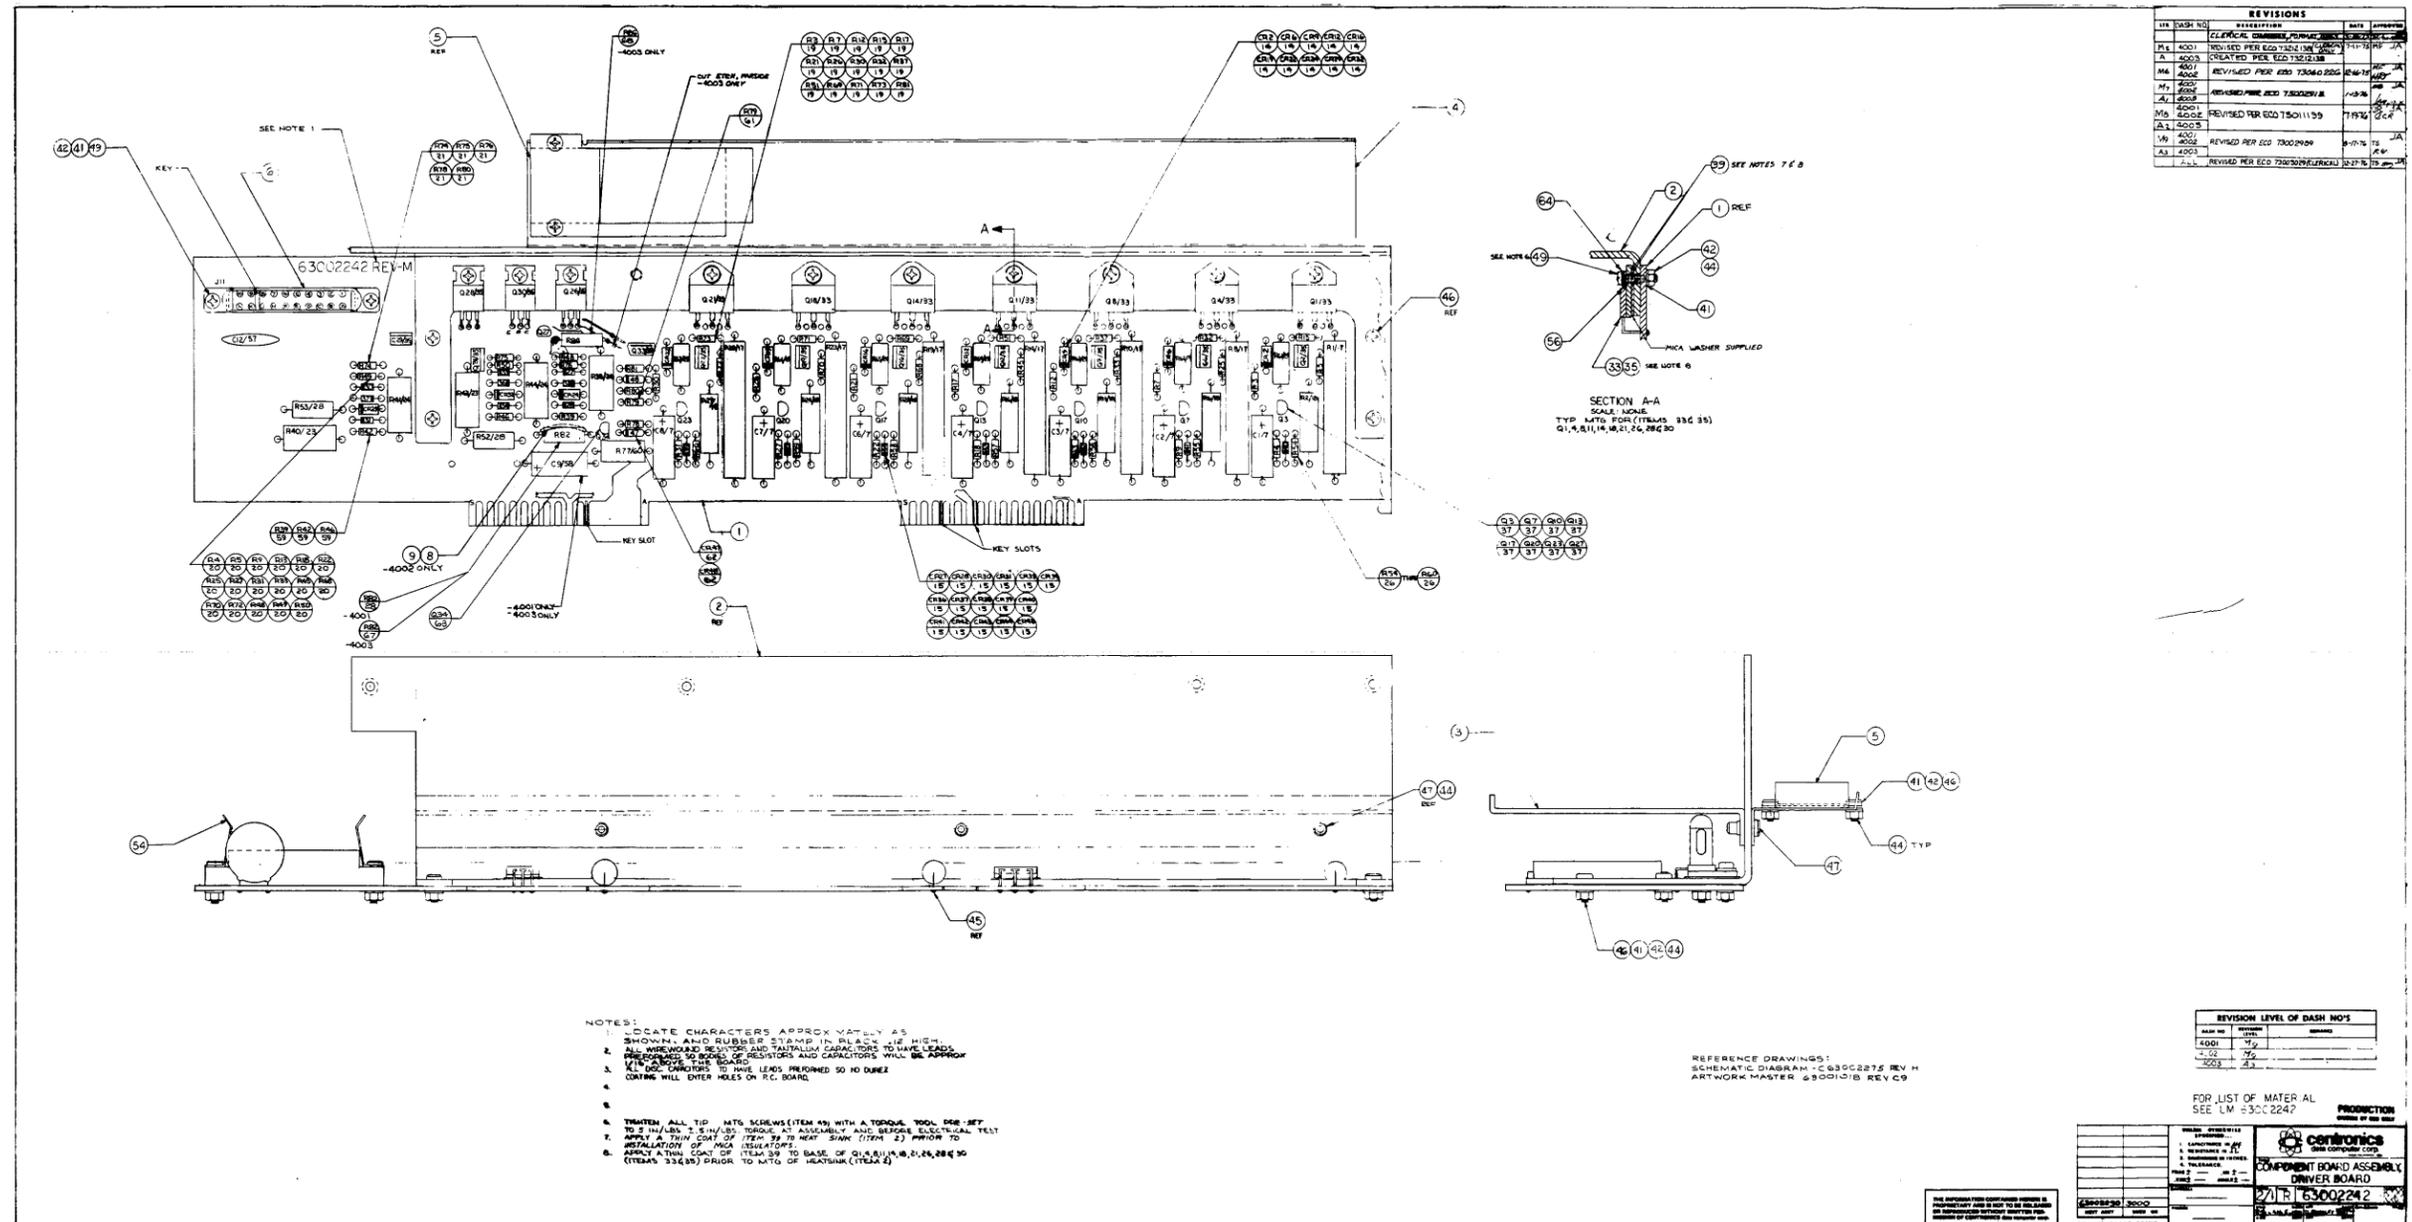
COMPONENT BOARD ASSEMBLY, POWER DRIVER
